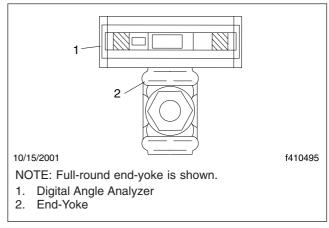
, Horizontal Positioning of Yoke Lug Machined Surface
